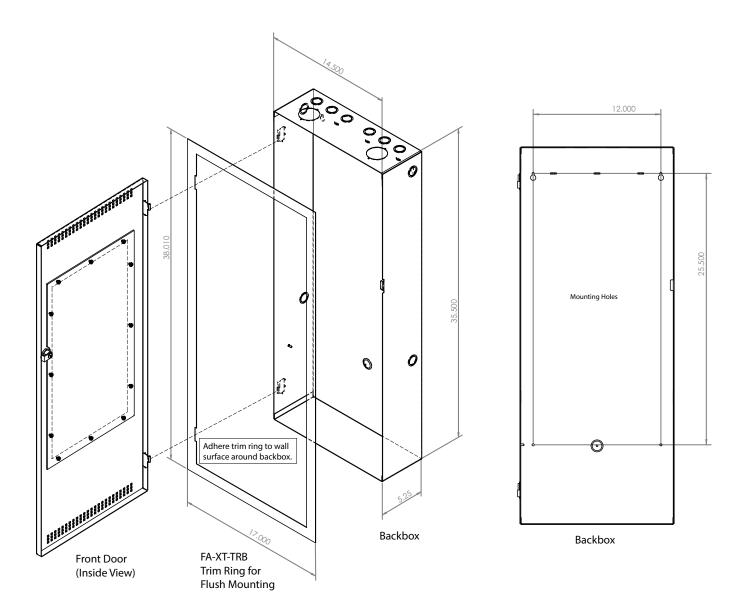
BB-5008 Enclosure Installation Instructions and Dimensions
